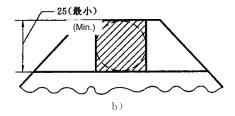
Shape and Dimension of Cross-Section of Thinning Specimen
